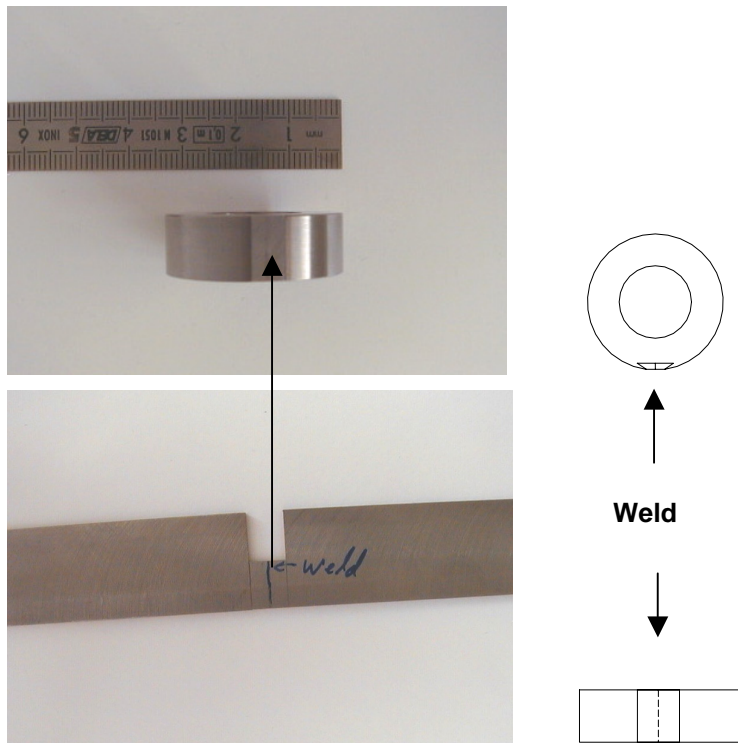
Insertion of the welded zone on the cylindrical T91 sample.
